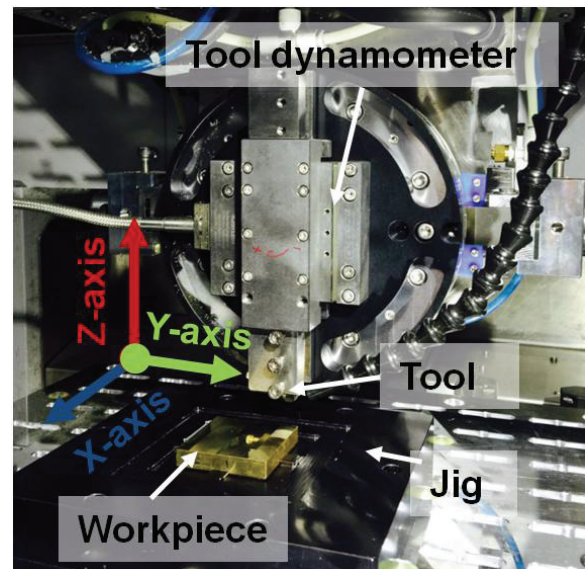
Prism pattern machining system on the sinusoidal surface
